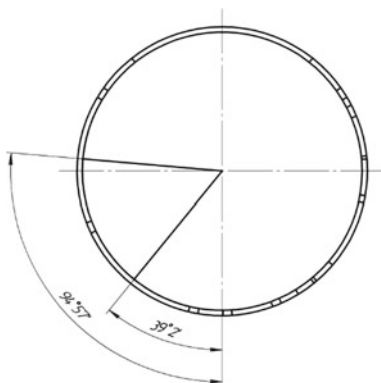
Location of the welded joint when tasking the workpiece in stand No. 1
